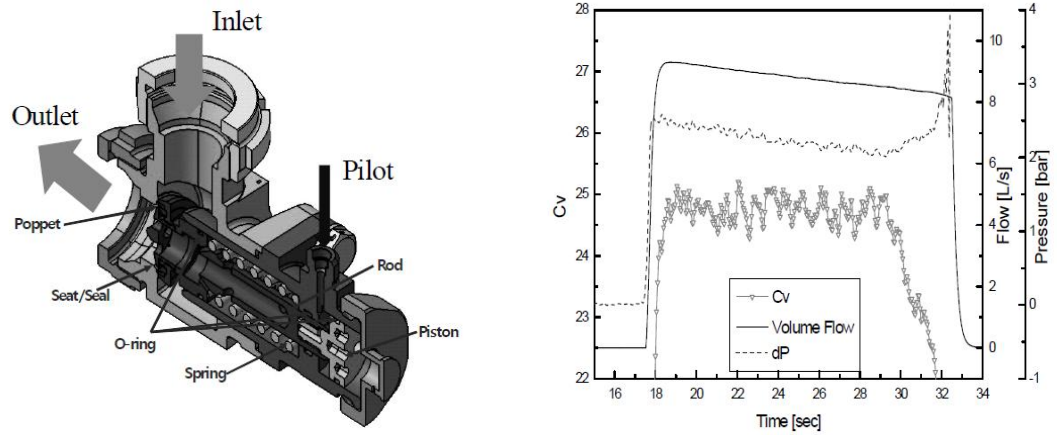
Gas Generator Fuel Valve and Test Result [46]
